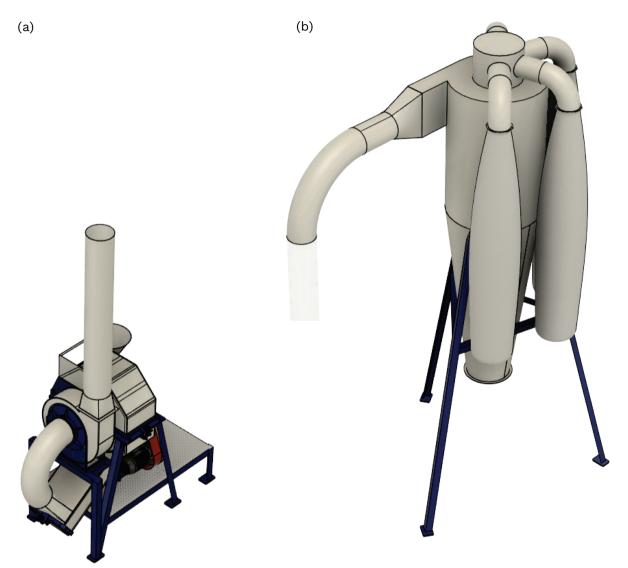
The multipurpose hammermill construction guide is divided into Part 1 (a) and Part 2 (b).
